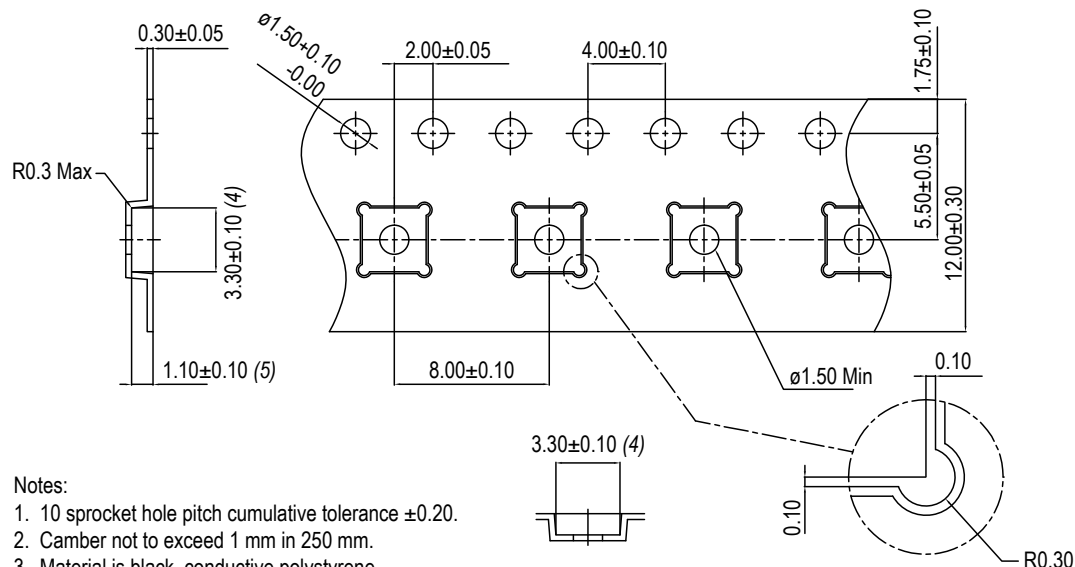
Tape Outline (BGA49 and BGA81 Packages)
